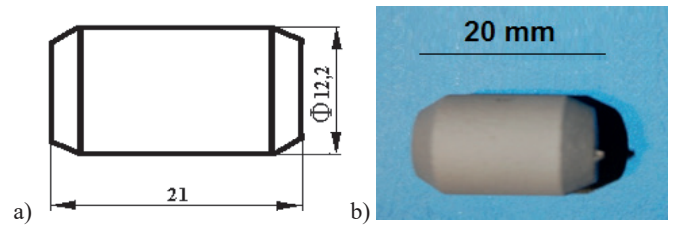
Example of the samples to research a) dimensions of samples b) view on the surface of coating obtained by hybrid system
